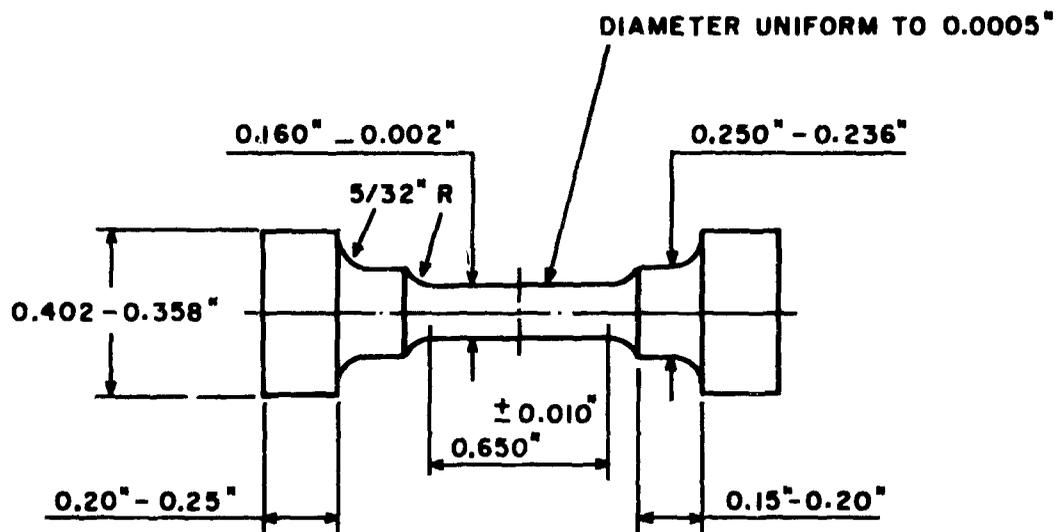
HOUNSFIELD TENSILE TEST PIECE.
